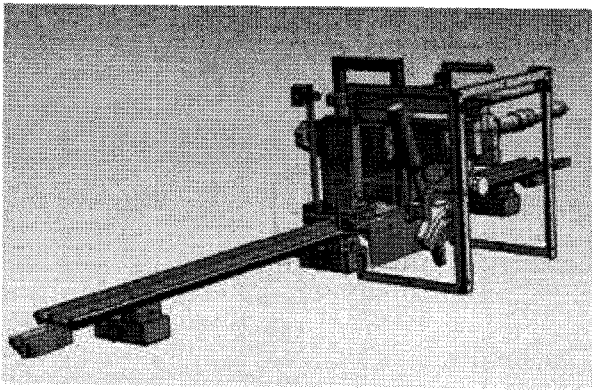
Hybrid Laser Welding Carriage.
